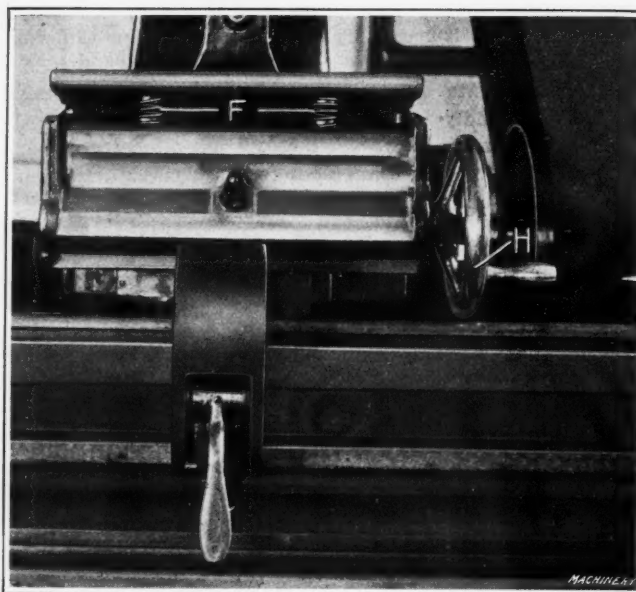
Cam-controlled Device designed for forming Irregular Shapes on Face of Grinding Wheel on Norton Plain Grinding Machines
